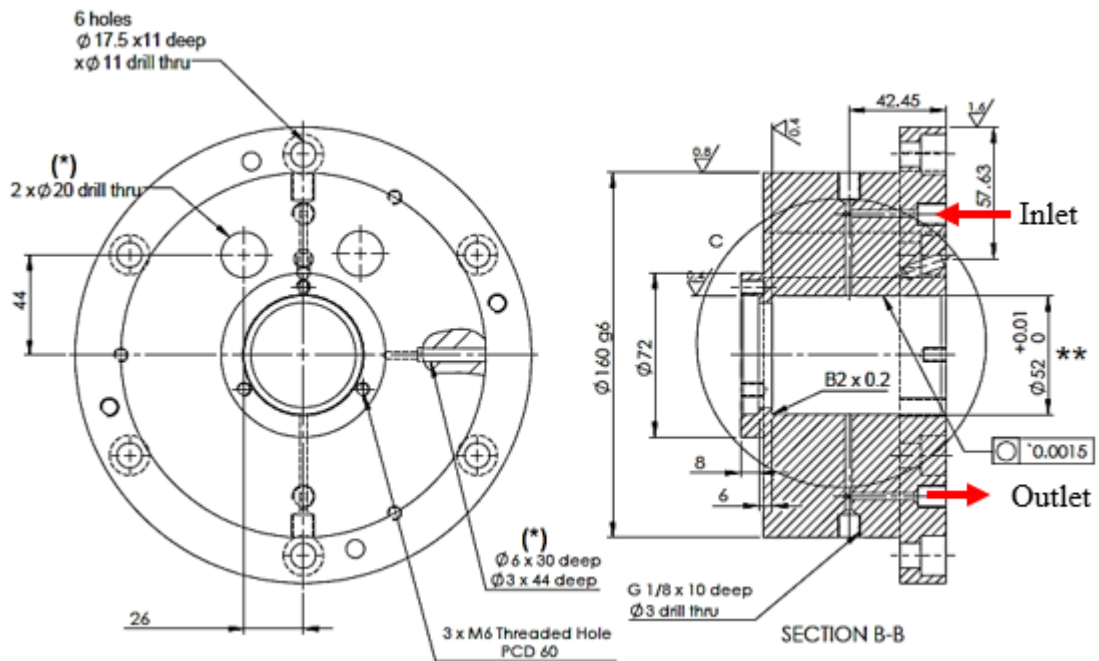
Design of the Rear Housing for the HSPM Generator
